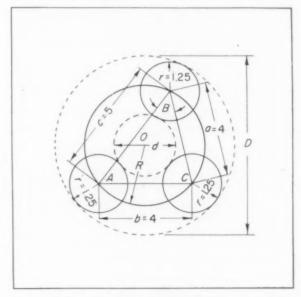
Dimensioned diagram illustrating the method of finding radii of gears internally and externally tangent to three gears of the same diameter.
